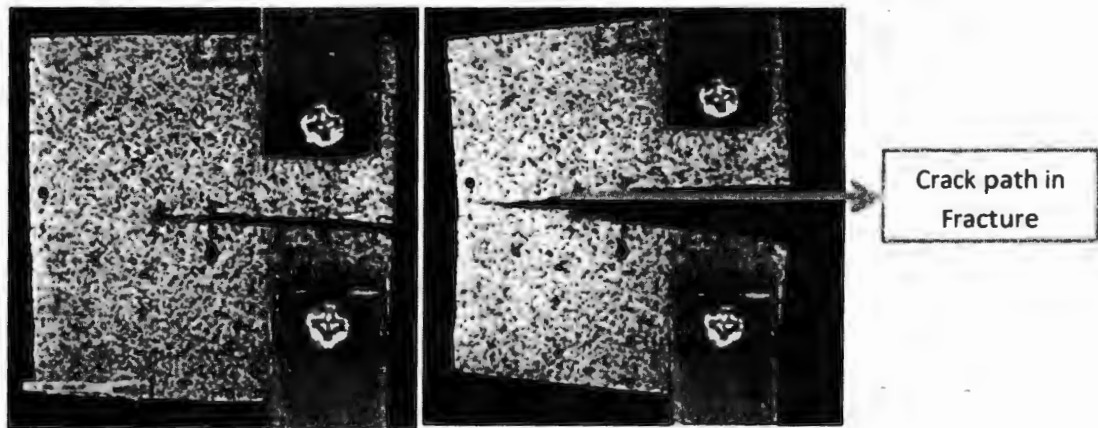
Longitudinal CT specimen before failure (left) and after failure (right)
